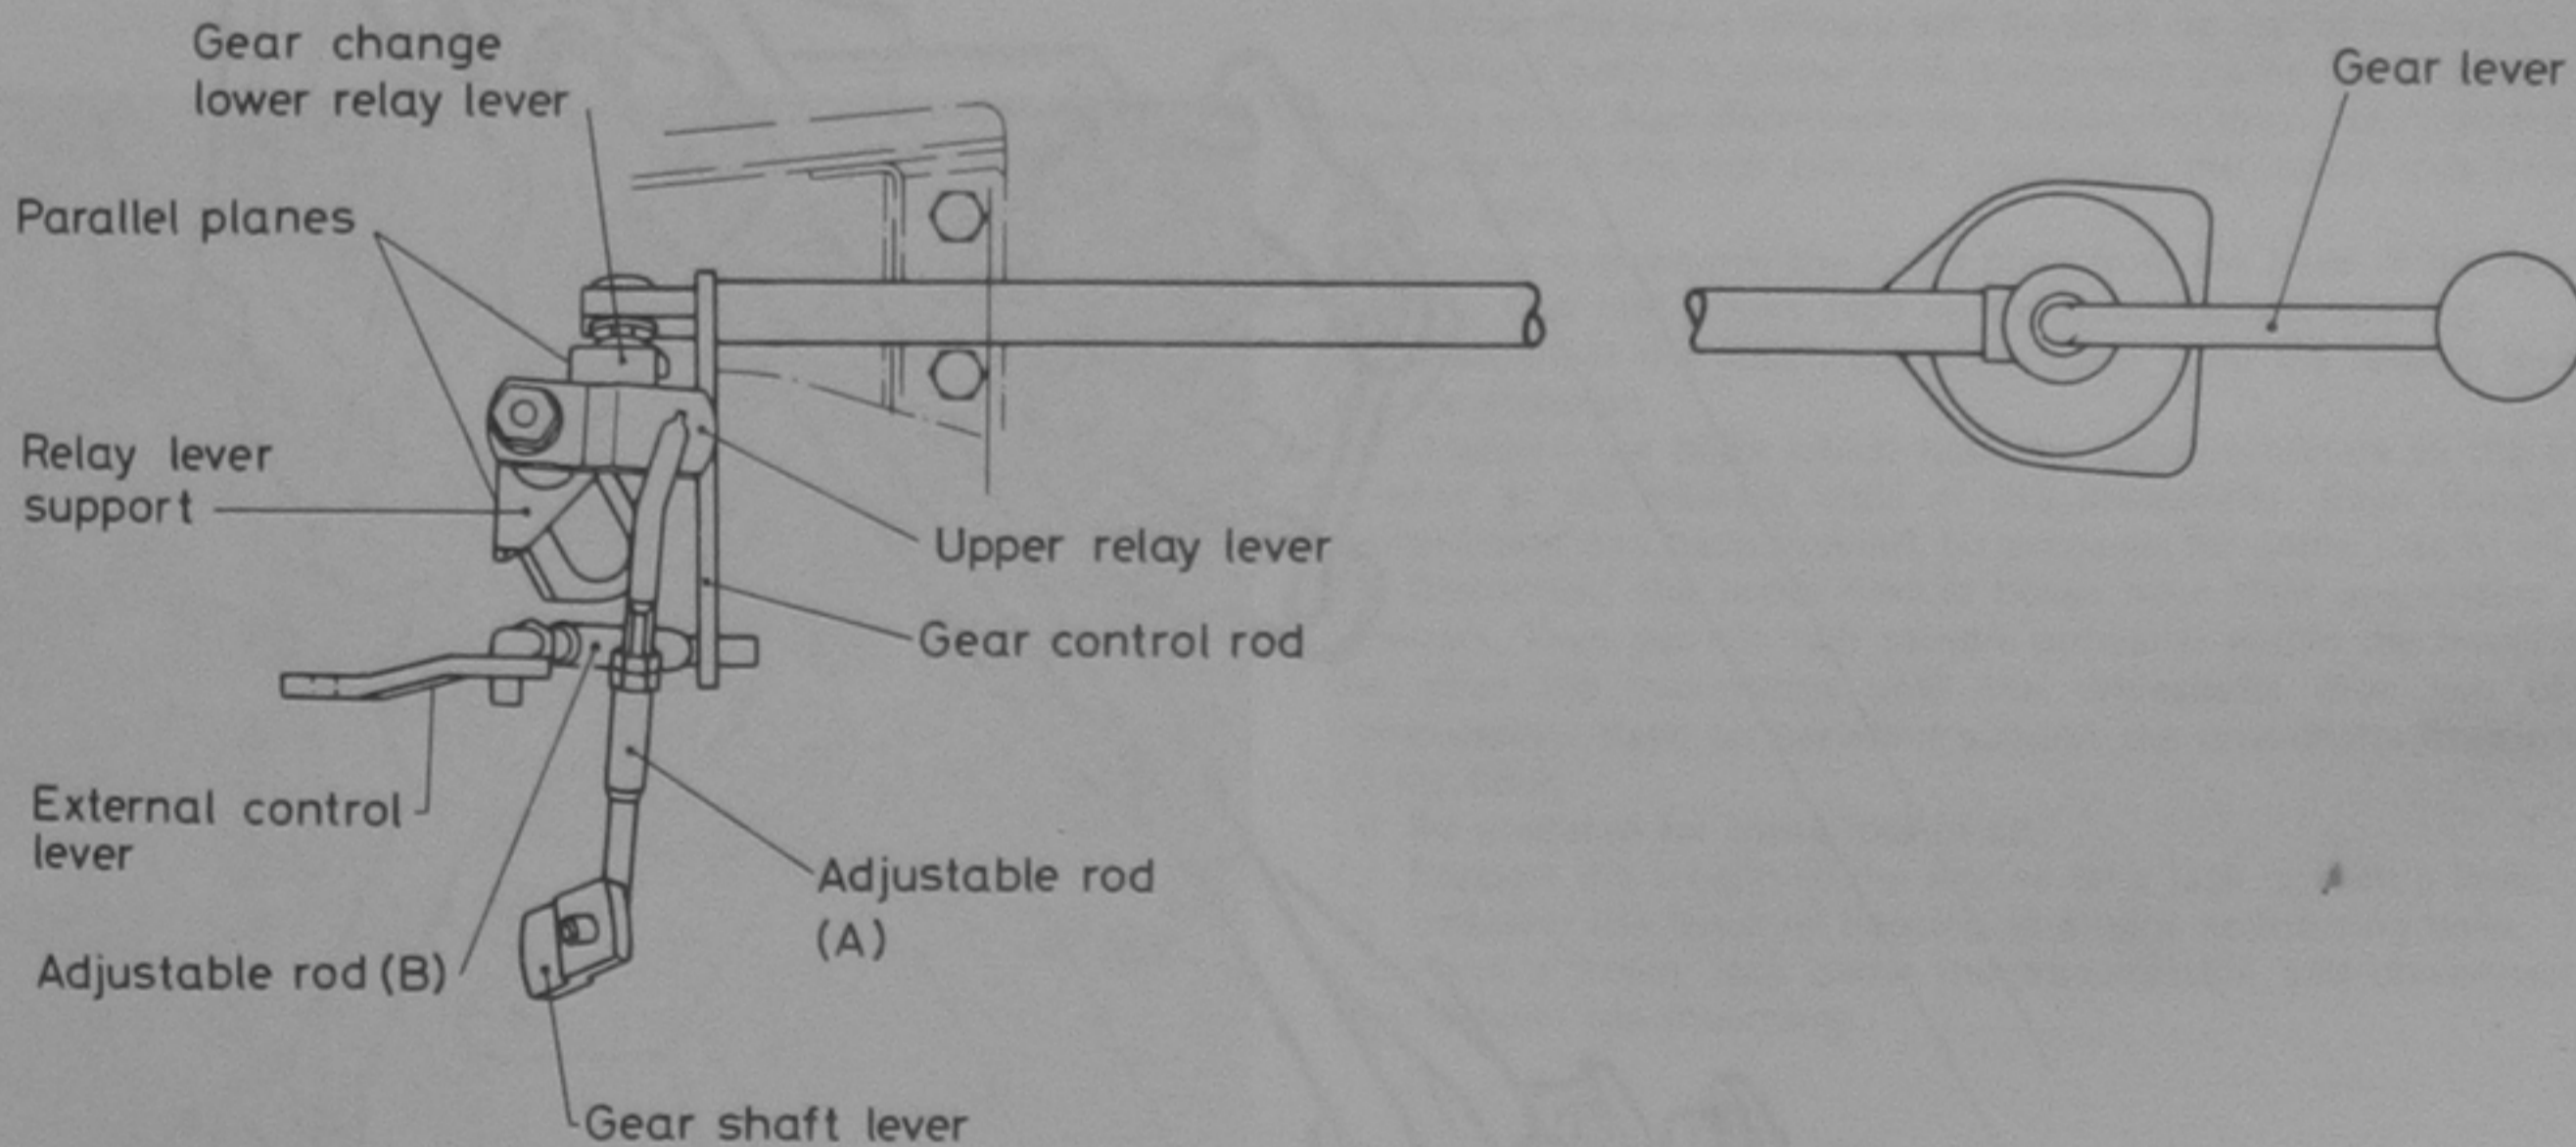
Adjustable type gearchange linkage (Sec 3)
